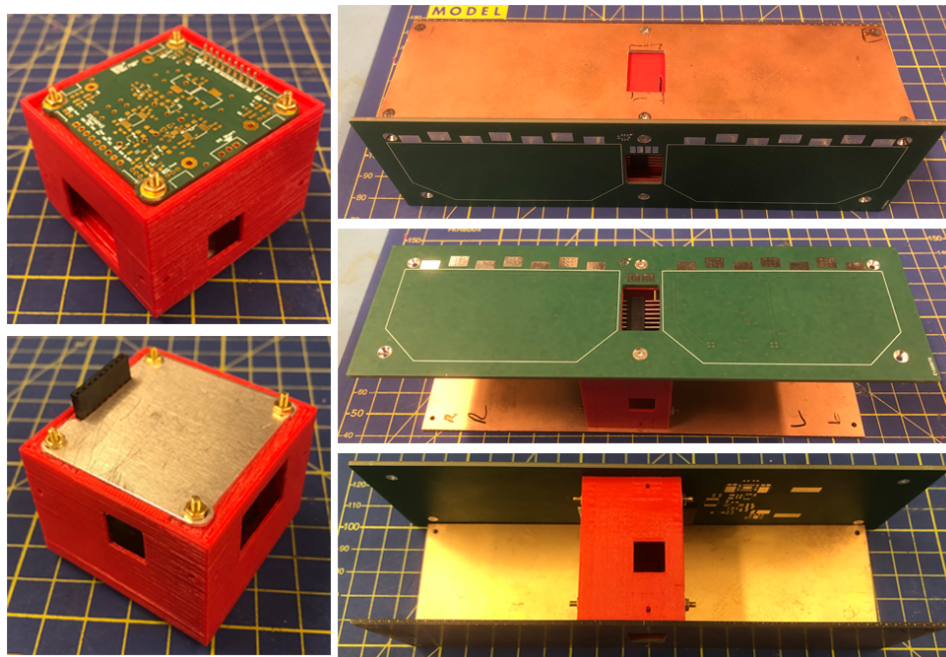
Cage, PCB, and satellite panels assembly. NOTE: 3D printed cage has two extra holes aligned with the satellite panel holes. They are made only for the purpose of the demonstration
